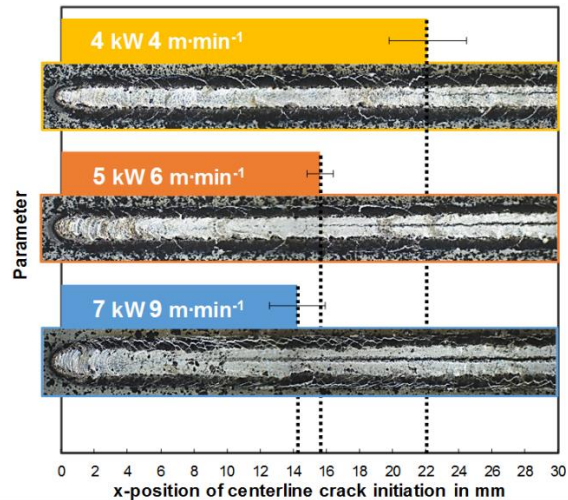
Visible beginning of centerline cracks in weld seams of different process parameters.
